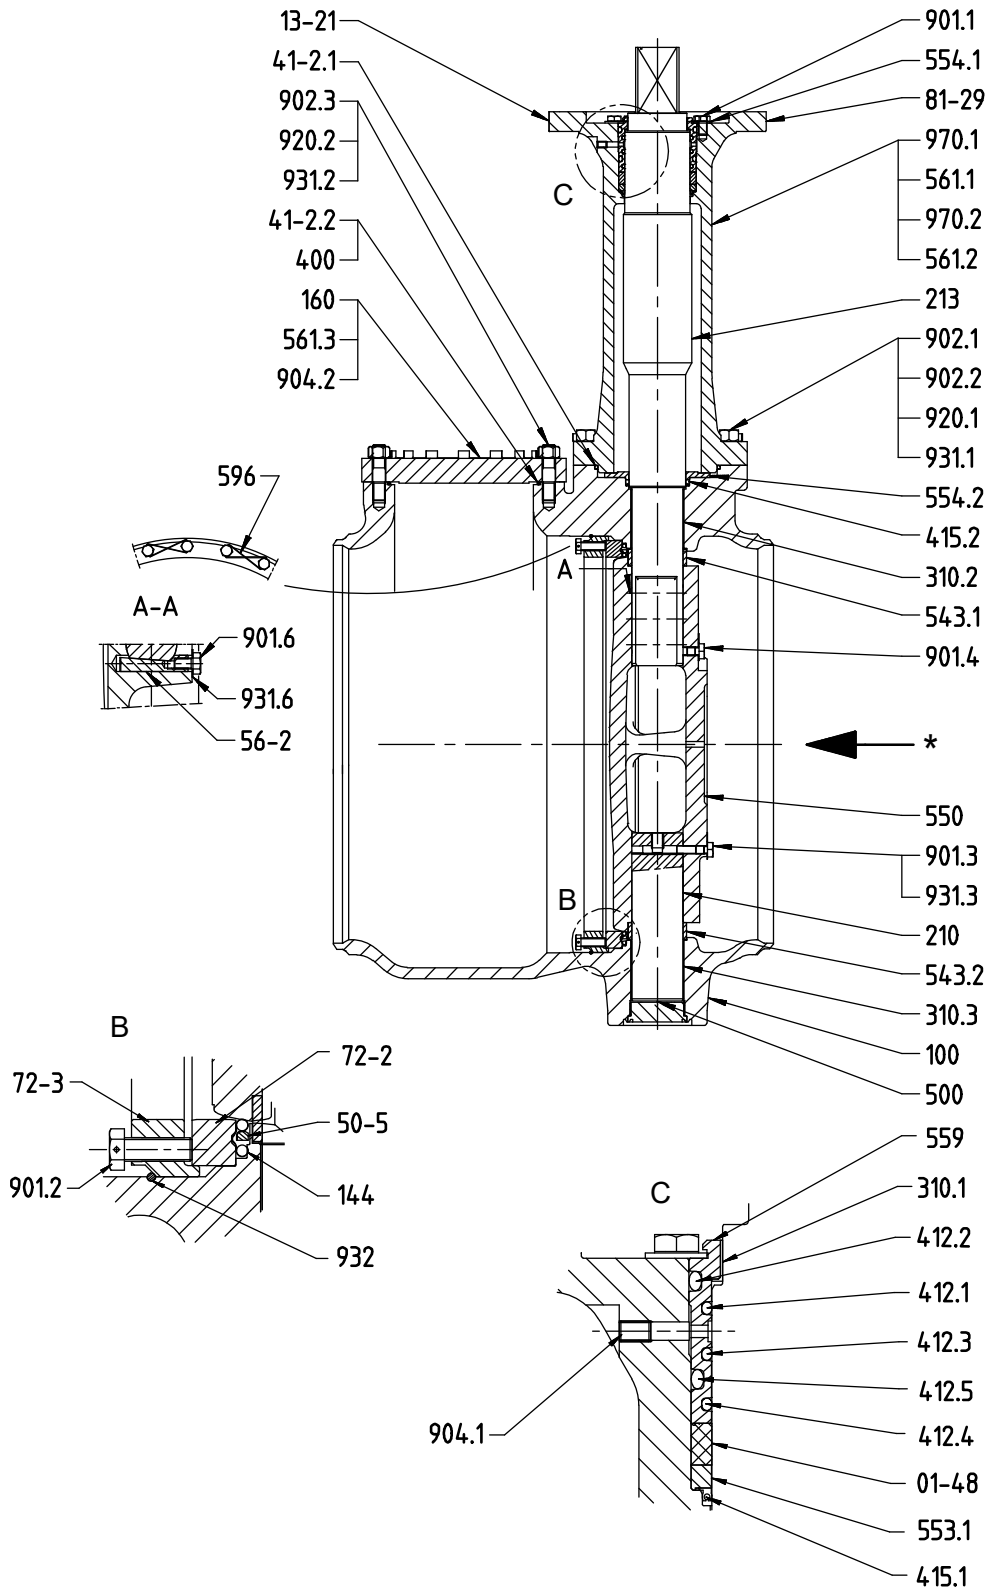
Sectional drawing of TRIODIS 150 CRYO BWSE - DN 650-700 (26-28 inch)
